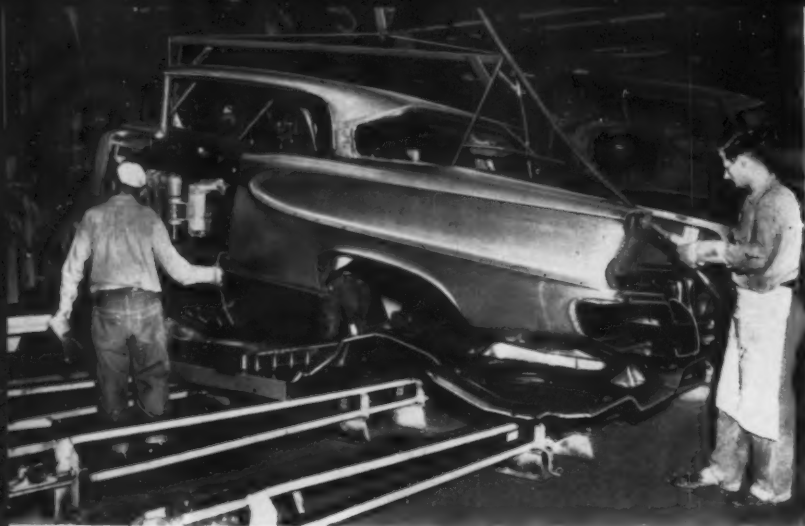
Partially completed body shell being lowered over a waiting floor-pan weldment. Both members will then be placed in a body buck to be joined by welding.
